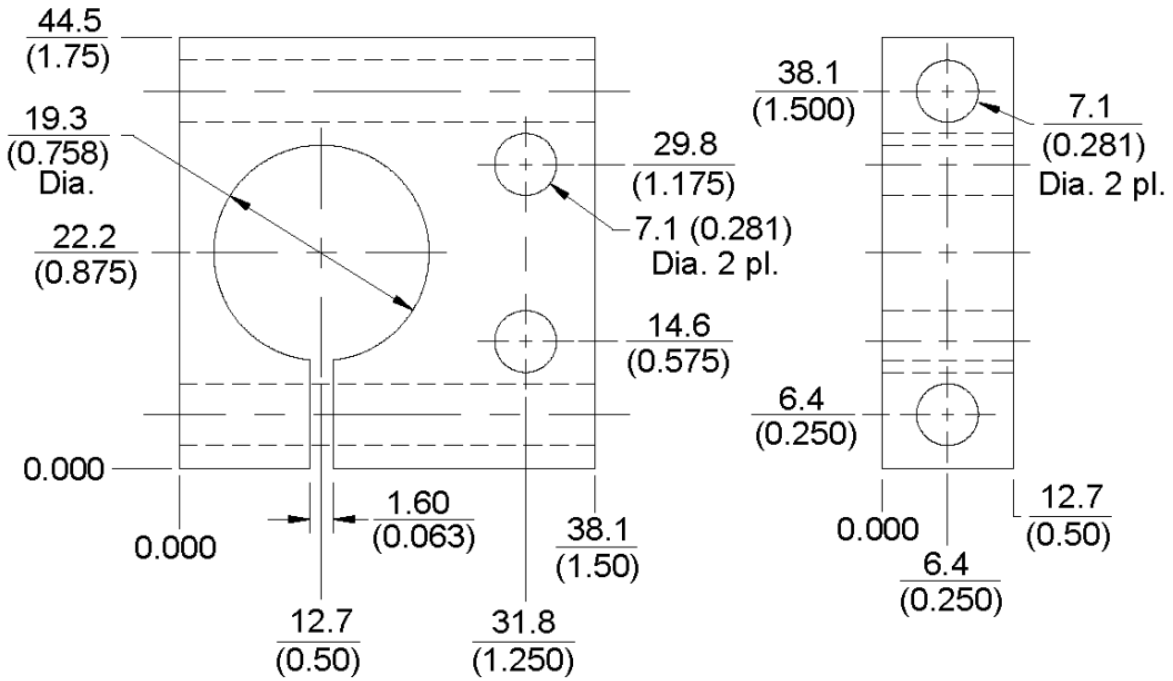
Mounting Clamp for 330303 Smooth Case Probe
